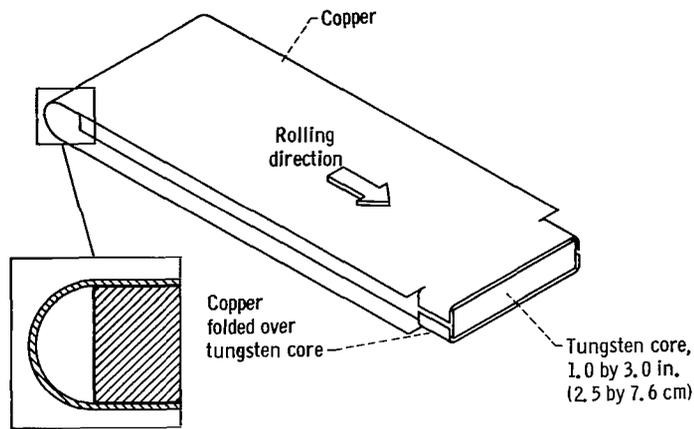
Schematic drawing of tungsten-copper assembly prior to rolling.
